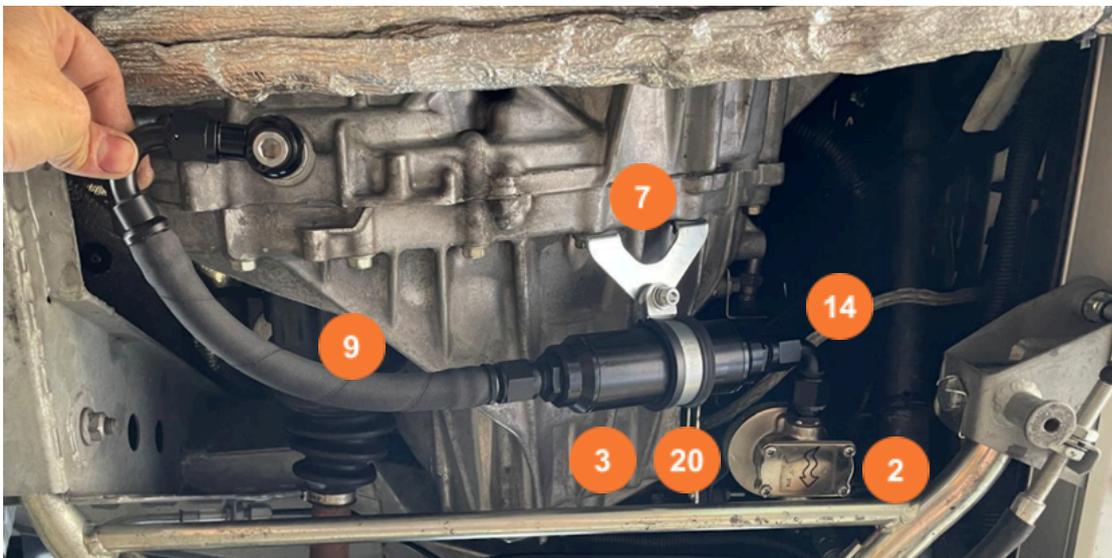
Installing the oil filter (3) and its connection to the gearbox.
